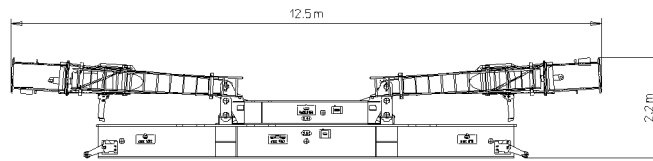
Divisible ballast pallet „VarioTray“ suspended ballast
